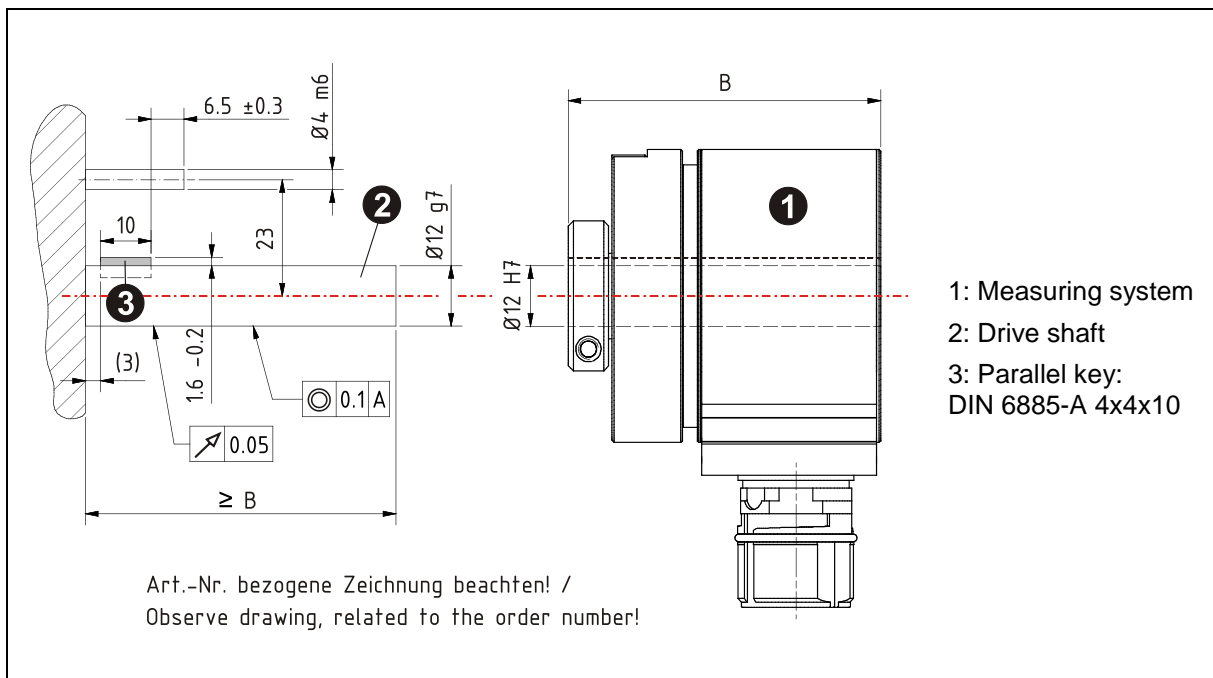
Requirements for the shaft mounting, example with shaft  $\varnothing 12$  H7
